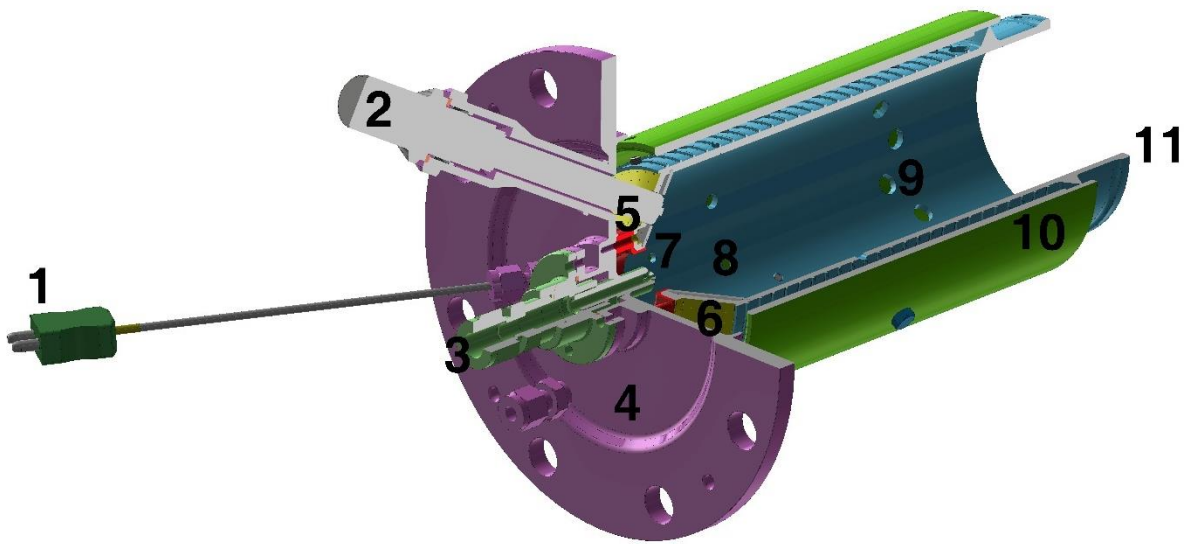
Combustor layout (1. K-type Thermocouple, (T31: combustor inlet air temperature 2. igniter 3. fuel injector main inlet 4. combustor end cover 5. swirler 6. head cooling sleeve 7. primary holes 8. secondary holes 9. dilution holes 10. casing 11. liner
